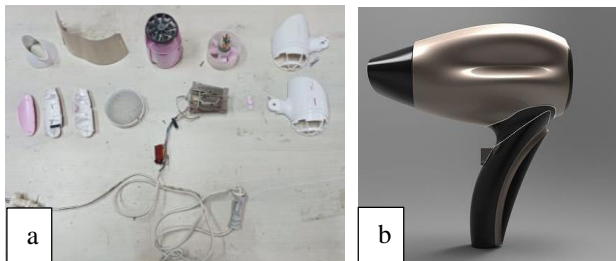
a) Disassembled Hair Dryer b) Improved 3D Model of Hair Dryer
